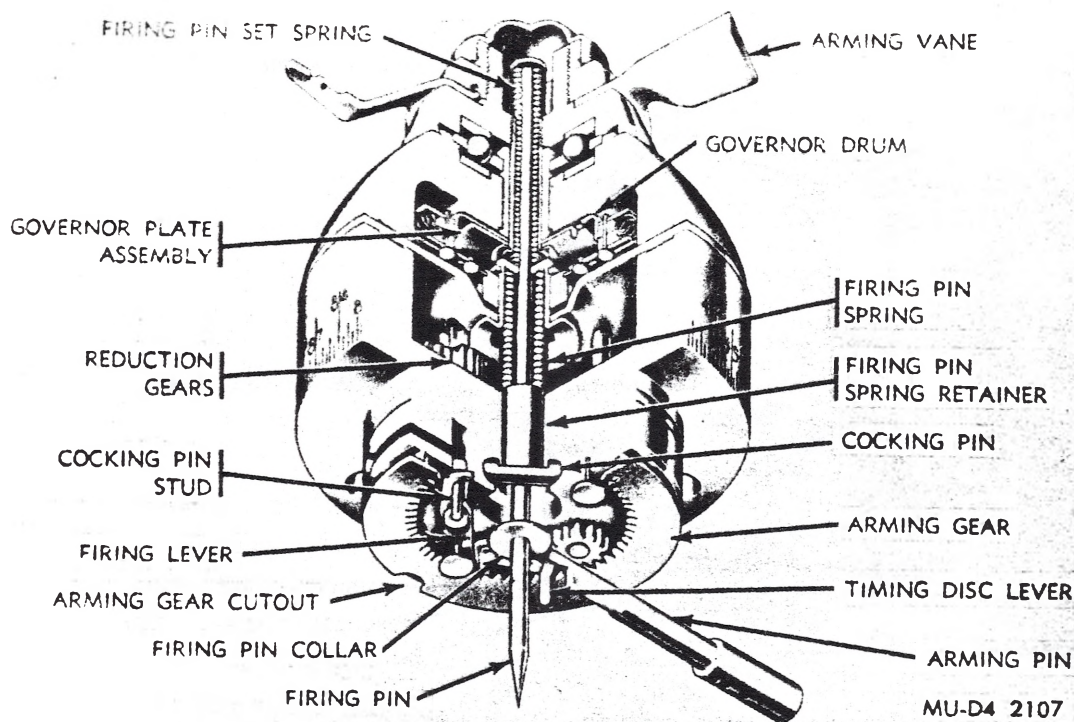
Fuze Head Assembly, Firing Pin Held in The Unarmed Position by the Arming Pin—Cutaway View
